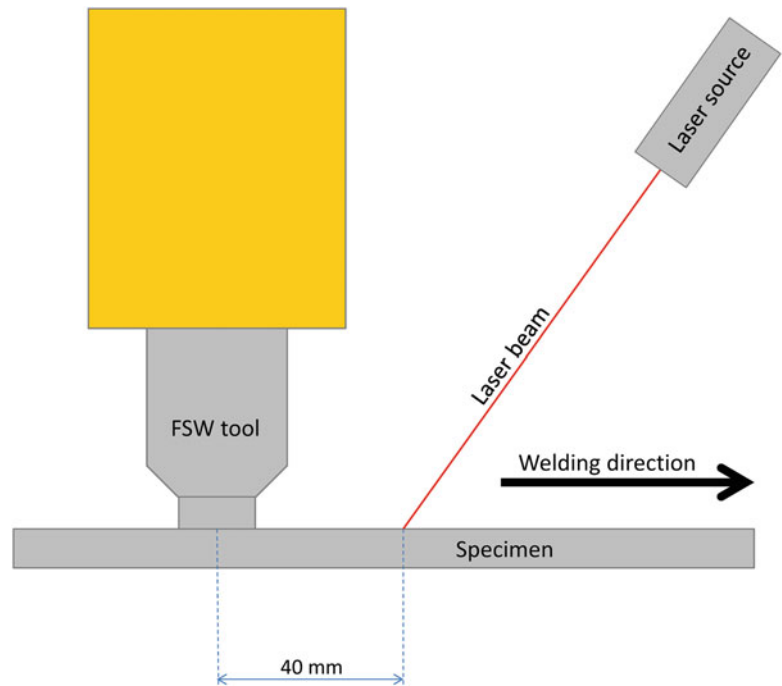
Tool geometry schemeFig. 32.2 LFSW scheme
